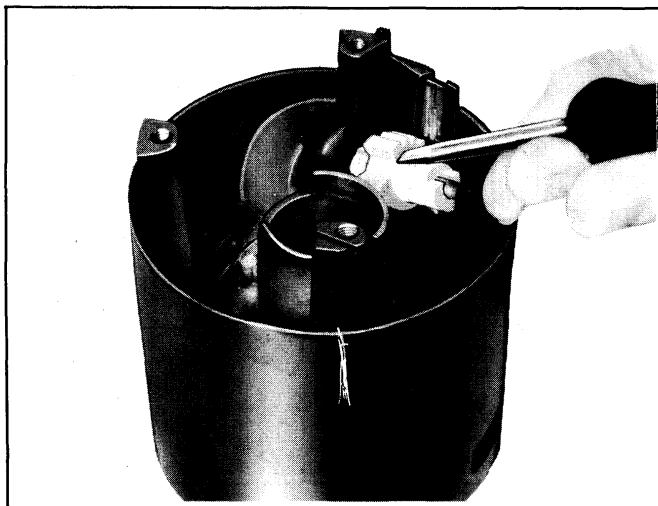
B-84--Removing Ignition Switch Actuator Sector
